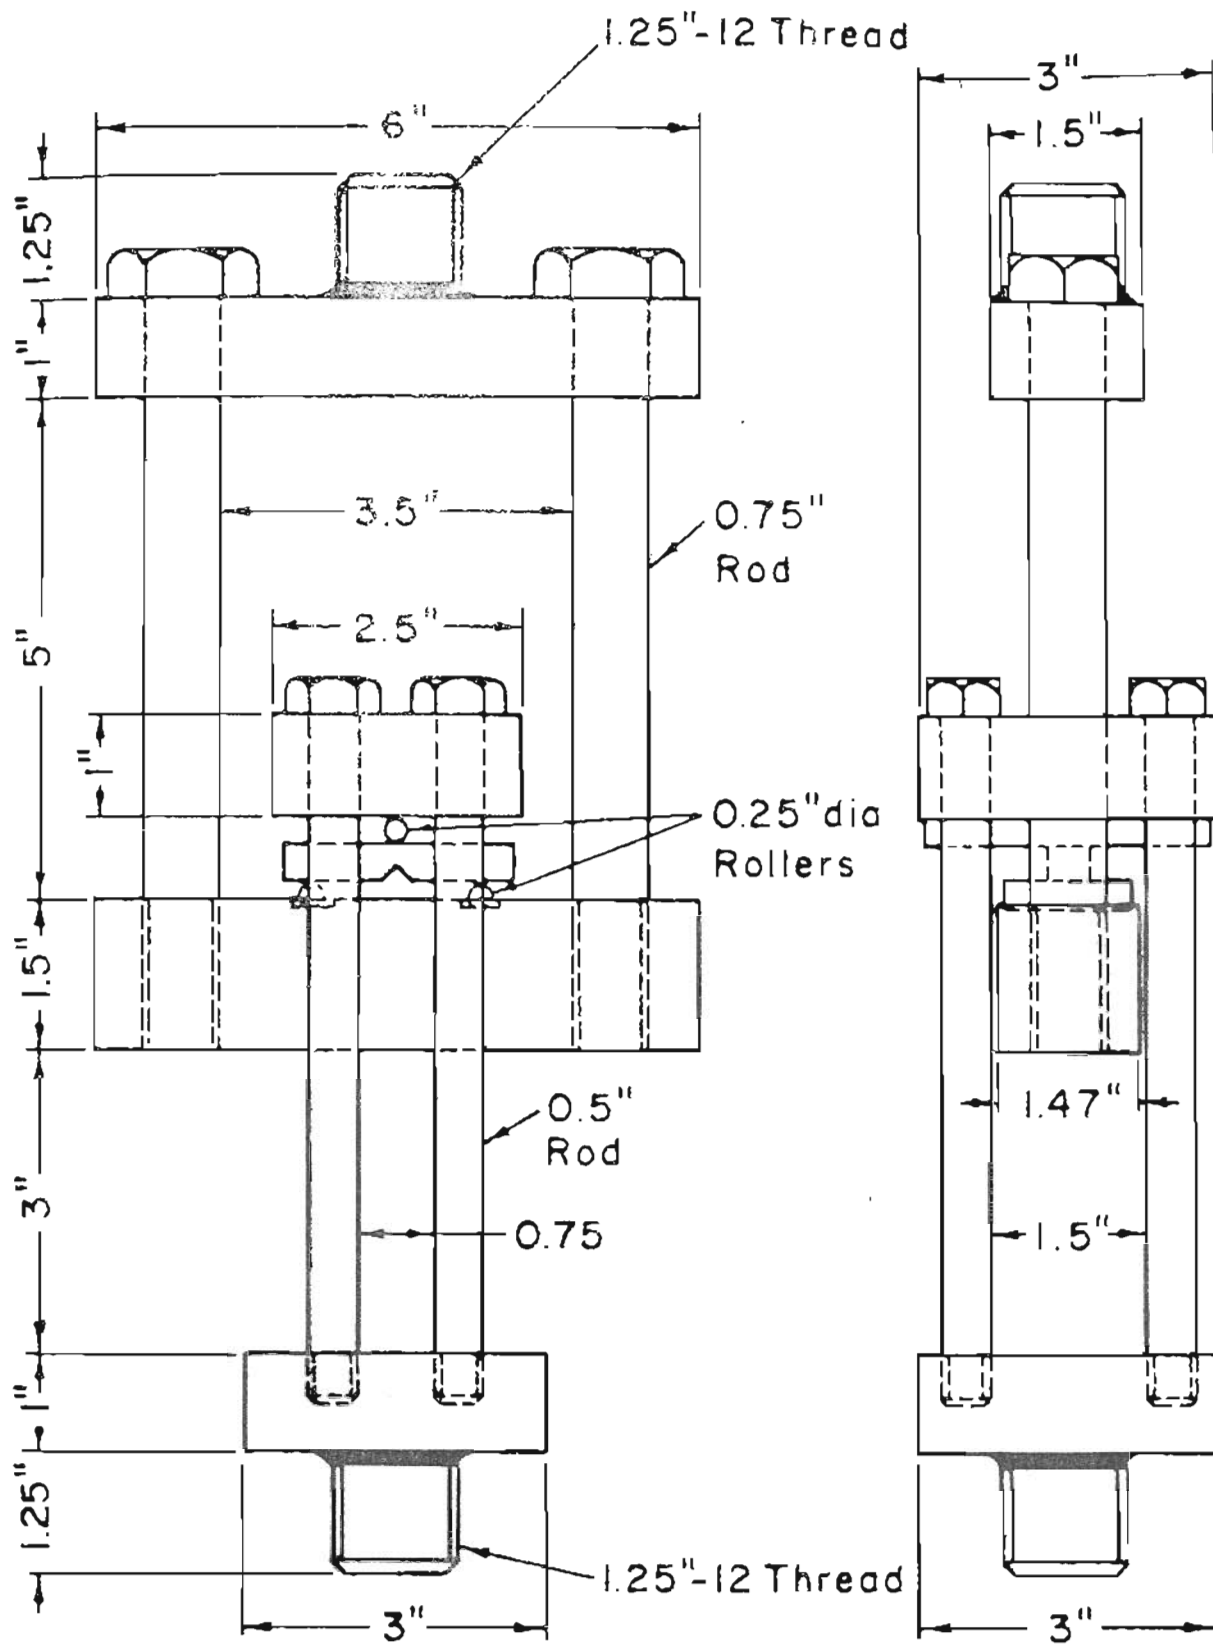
Testing fixture for slow-bend Charpy specimen.
